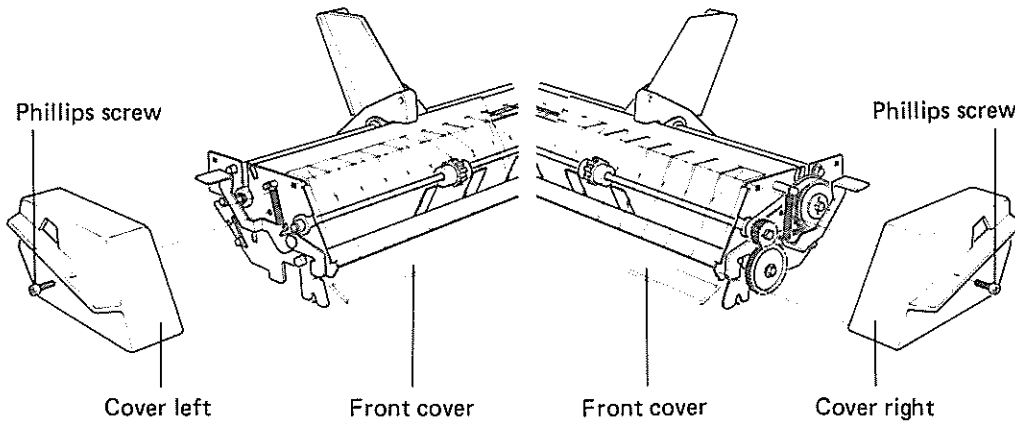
#8331/8333 Cut Sheet Feeder
